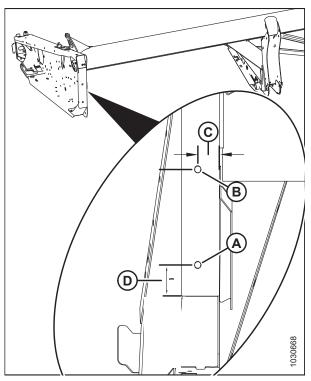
Jack Mounting Hole Locations, View from Rear – FD1/FD70
